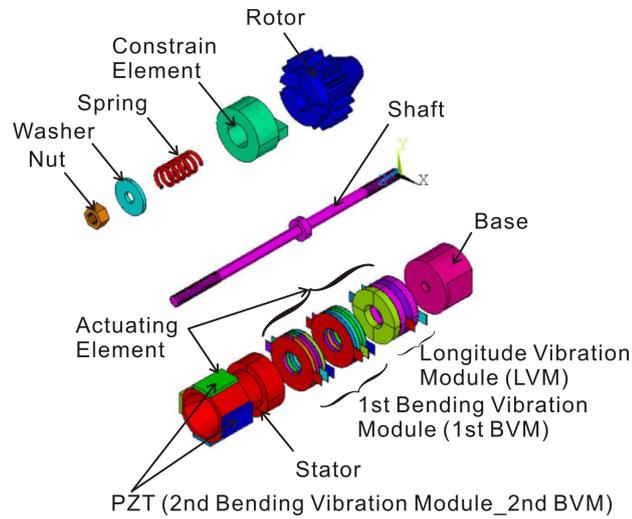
The exploded view of the multiple composite piezoelectric motor.
